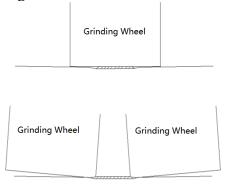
Schematic diagram of spiral weld grinding optimization
